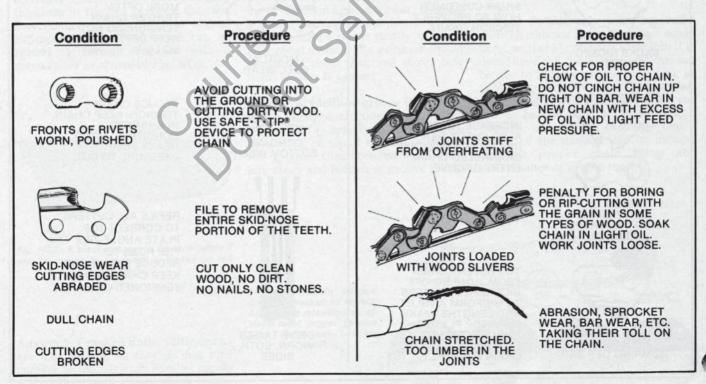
Chain conditions caused by abrasives or insufficient lubrication.
